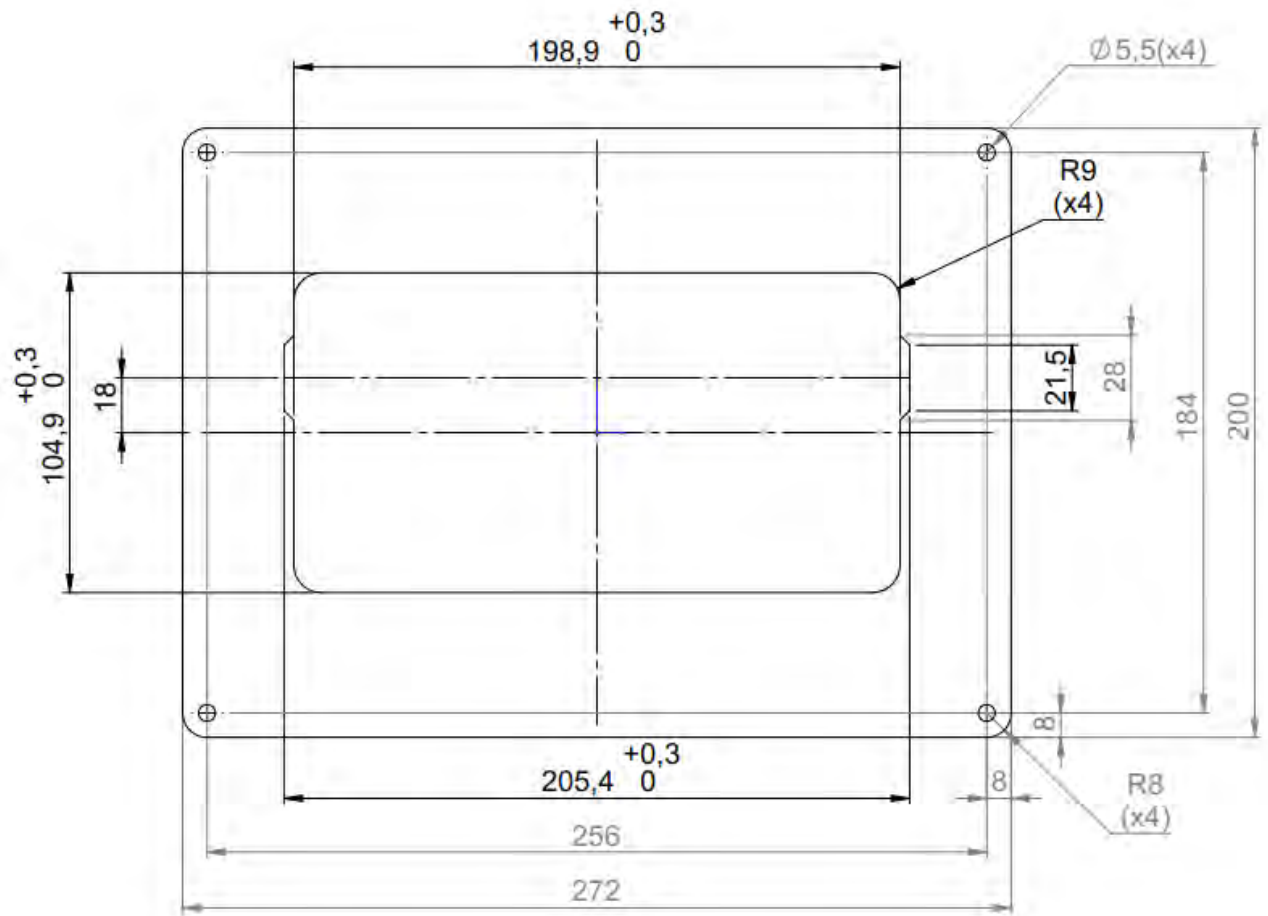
R6 CDU, Mounting frame dimensions [mm]
